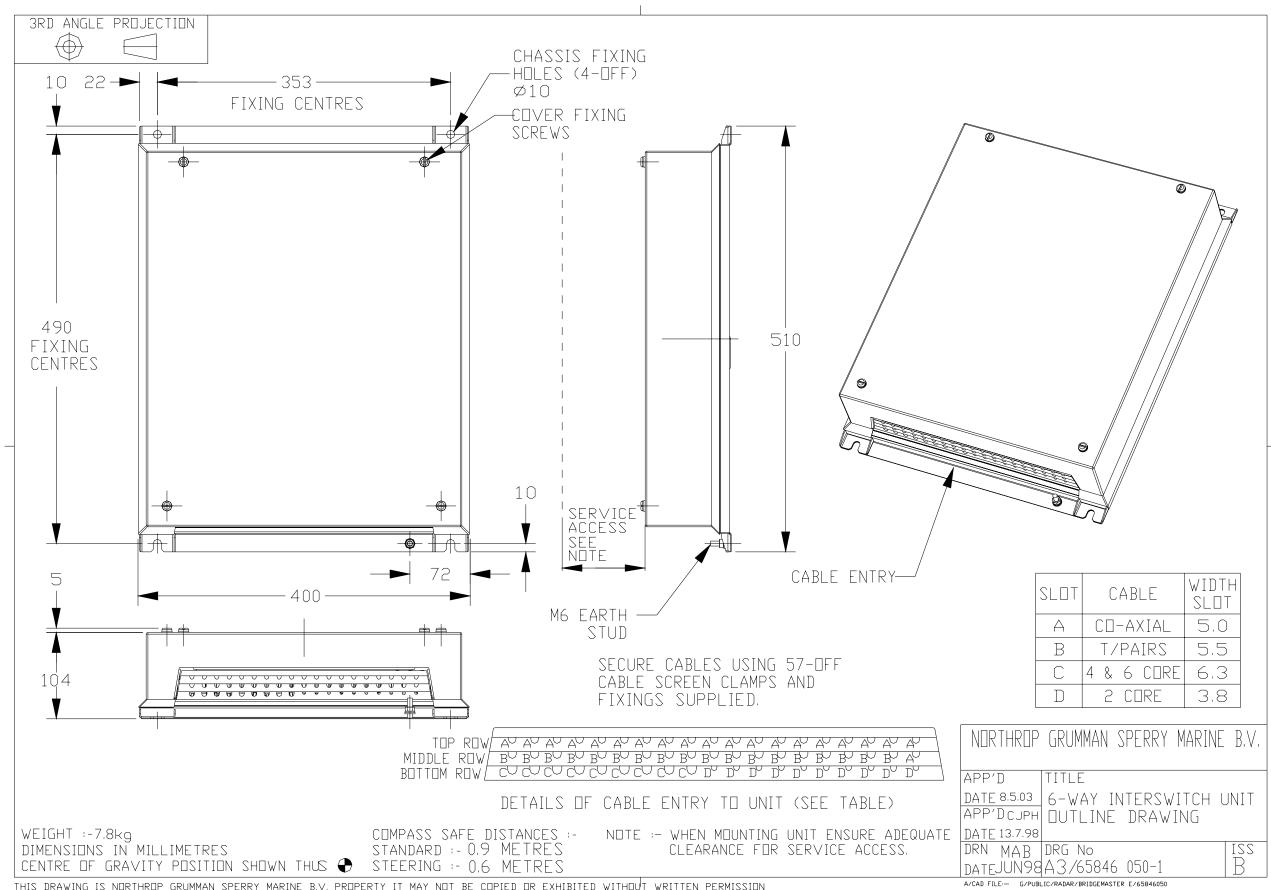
6-Way Interswitch Unit – Installation Drawing
